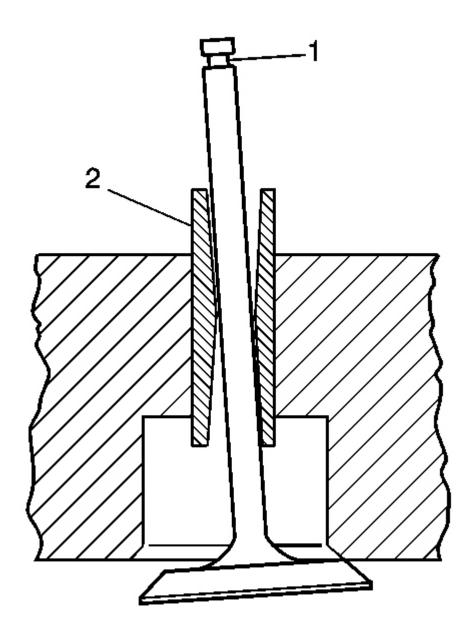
Inspecting For Excessive Valve Stem To Guide Clearance Courtesy of GENERAL MOTORS CORP.
